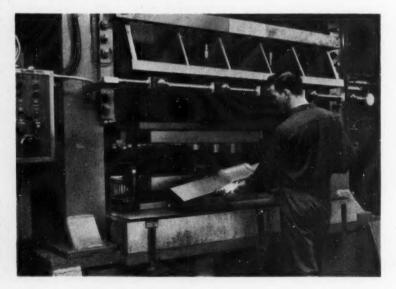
Sheared Blanks are Here being Drawn on a Bliss Straight-sided Mechanical Press. The Design is Such that Damage to the Vinyl is Avoided
